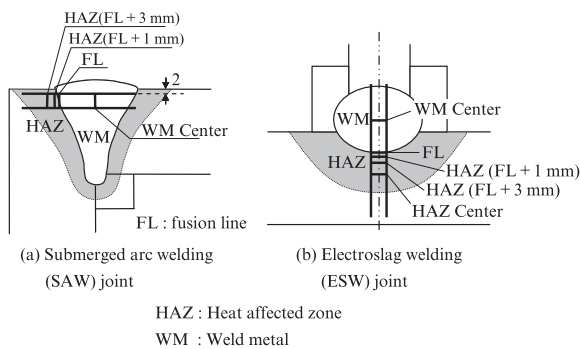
Positions of Charpy impact test specimens for the welded joints
